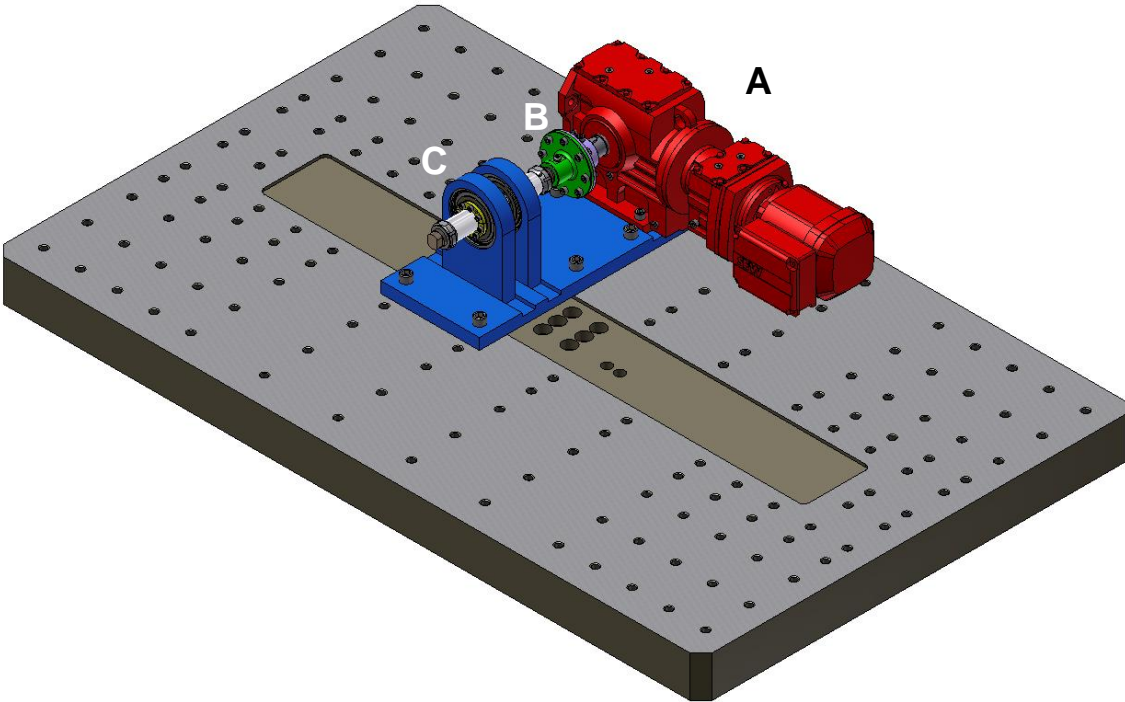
Schematic diagram showing the tube rotation drive and the clamping system mounted on the bed of the I-STIR FSW platform. The three main components A, B, and C are described in the paper.
